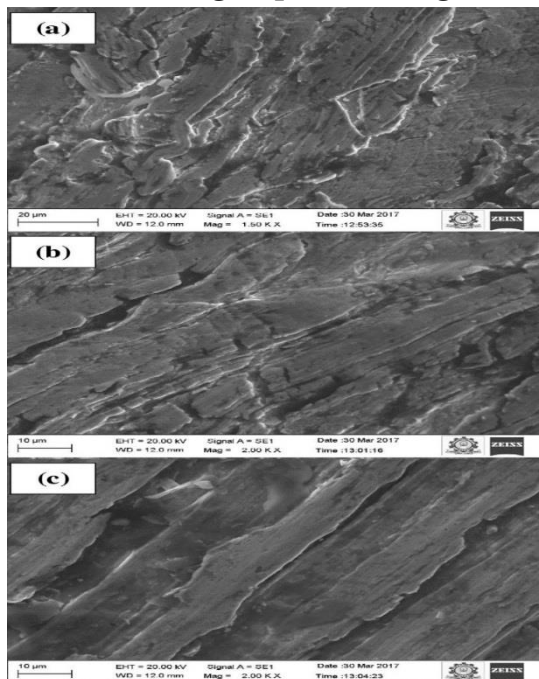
Fracture zone of weldments (a) SS316L similar joints (b) Inconel 625 similar joints (c) SS316L and Inconel 625 dissimilar joints.
